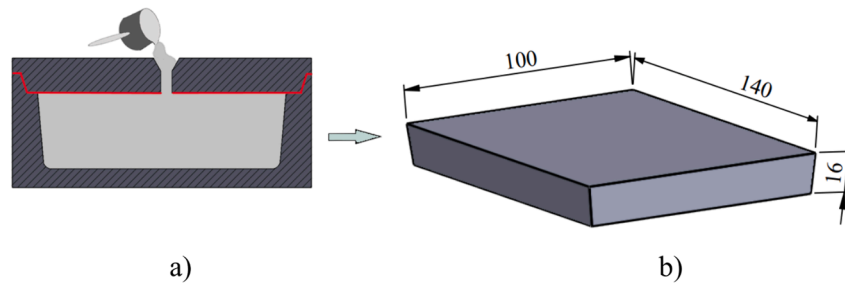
Casting process, a) Permanent mold and b) Casted part (Dimensions in mm).
